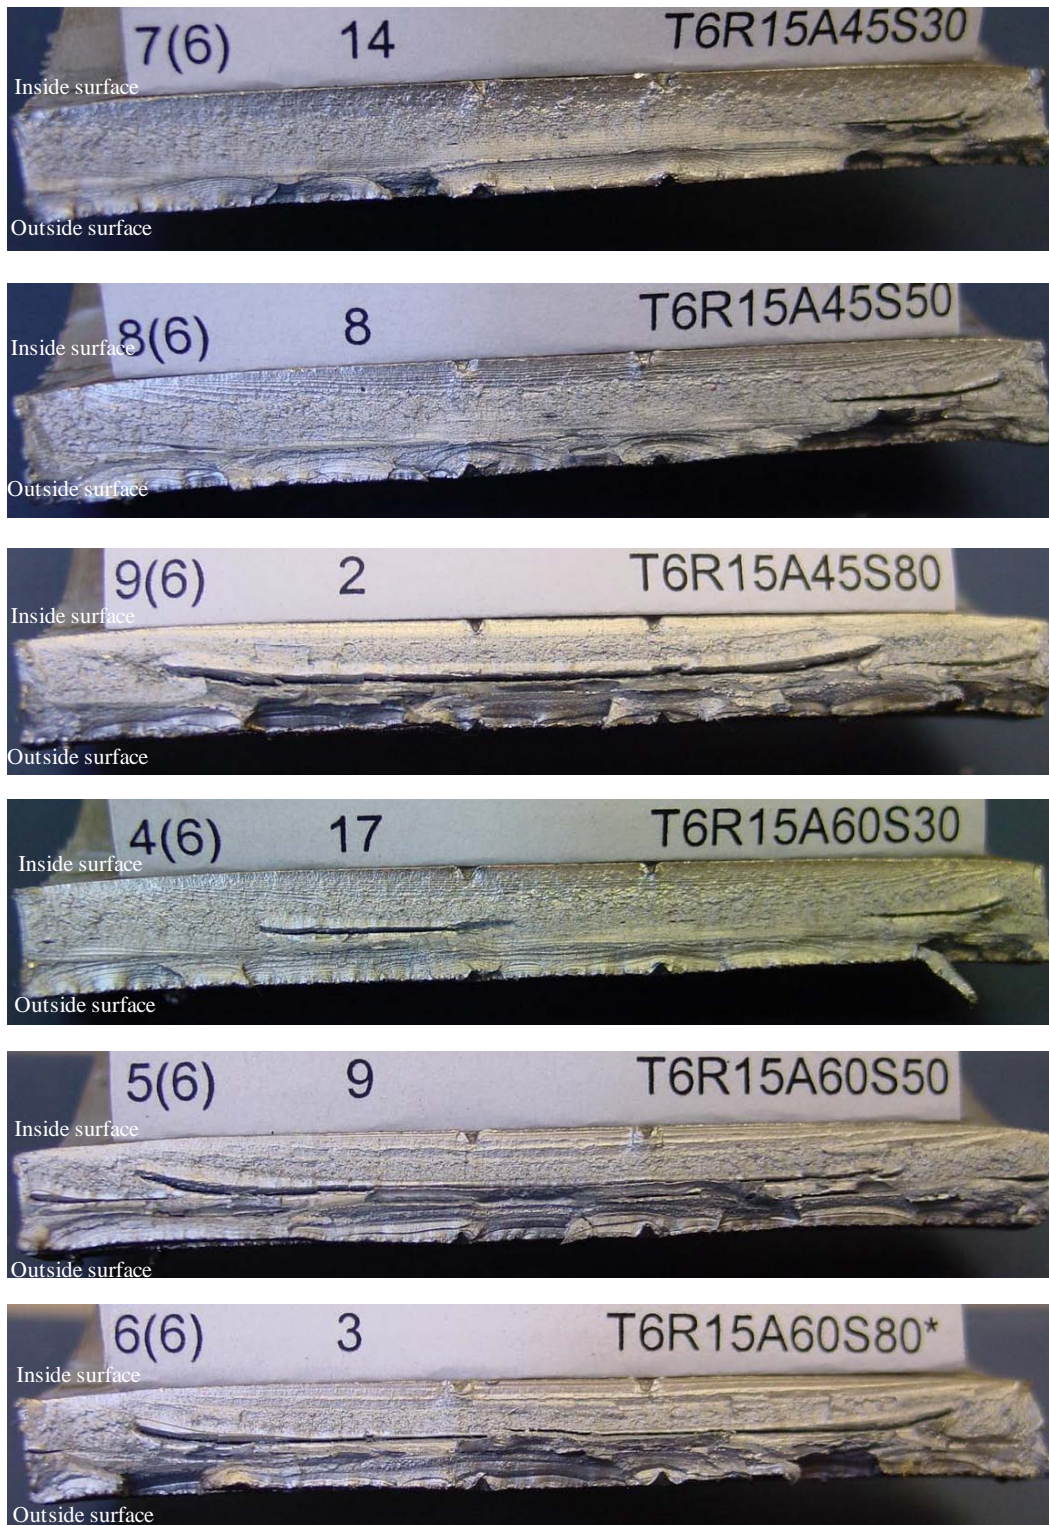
Pictures of fracture surface: strip specimen series of T6R15
